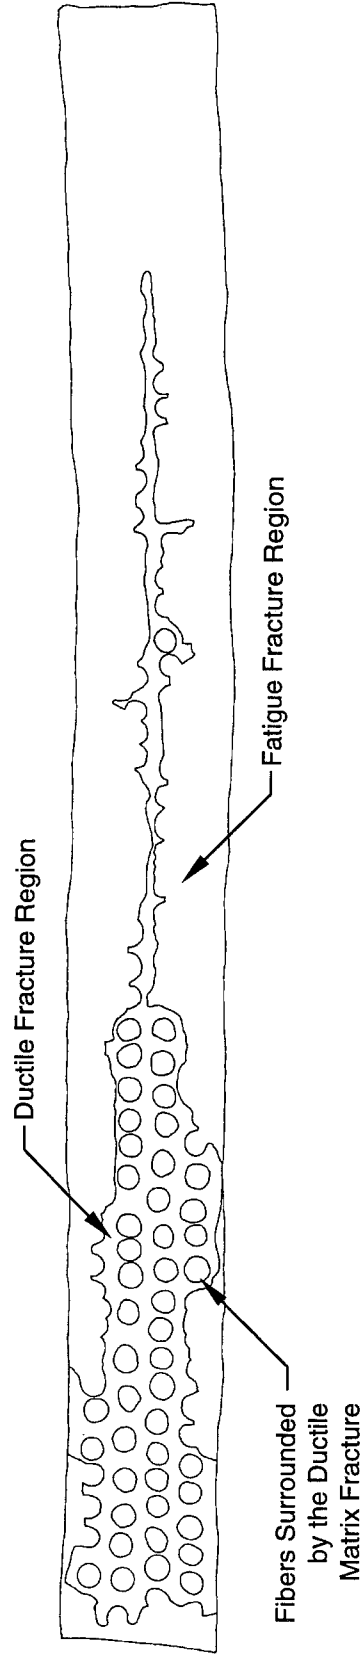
shows a fracture surface of the thermomechanical test specimen. The right side of the fracture surface is dominated by a fatigue-induced, flat fracture surface that extends from the outer surface of the specimen and penetrates toward the center. Neu and Nicholas² described the
